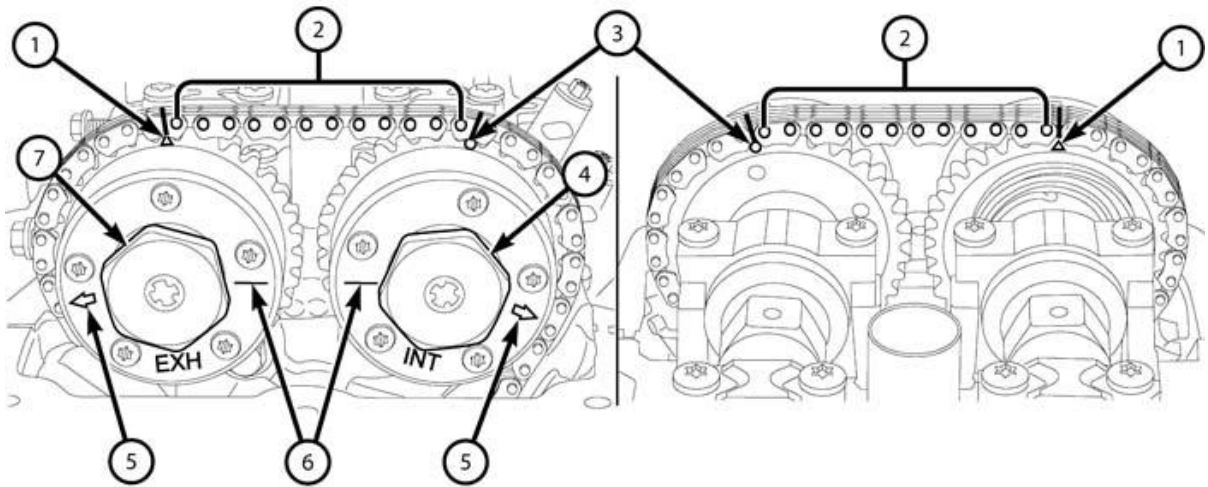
Arrows, Scribe Lines & Cylinder Head Cover Mounting Surface
